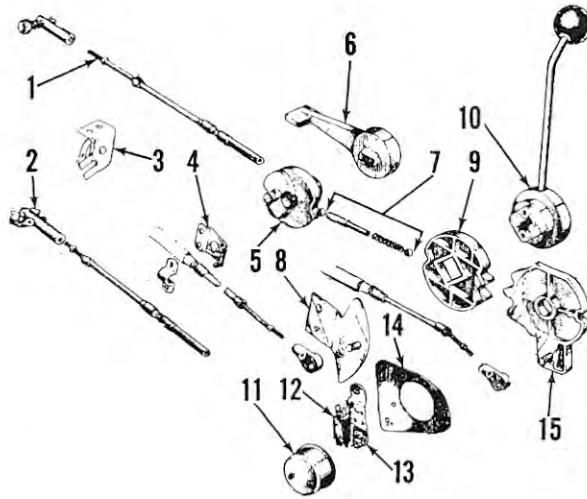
Remote control unit with cover removed showing location of components. Refer to Fig. H34 for legend except for the following.
